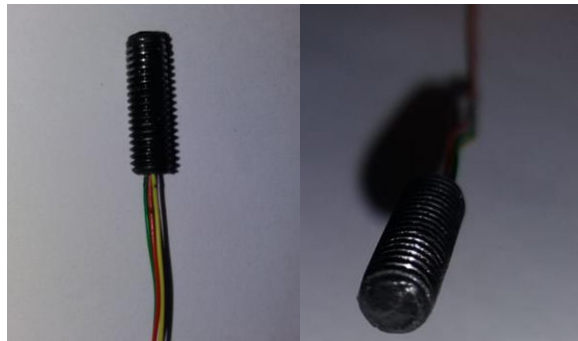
Final Design of PCB Holder for DAF Follower
